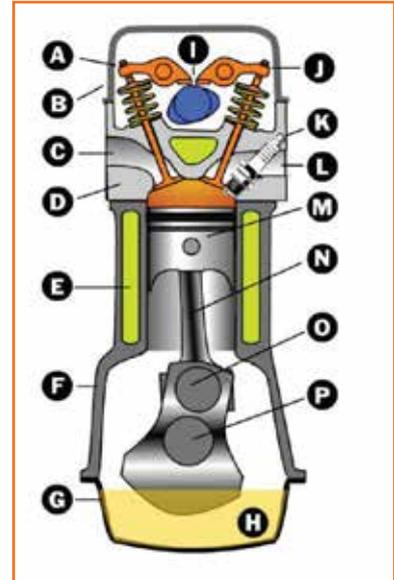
Engine Cut Section to Show Internal Parts
